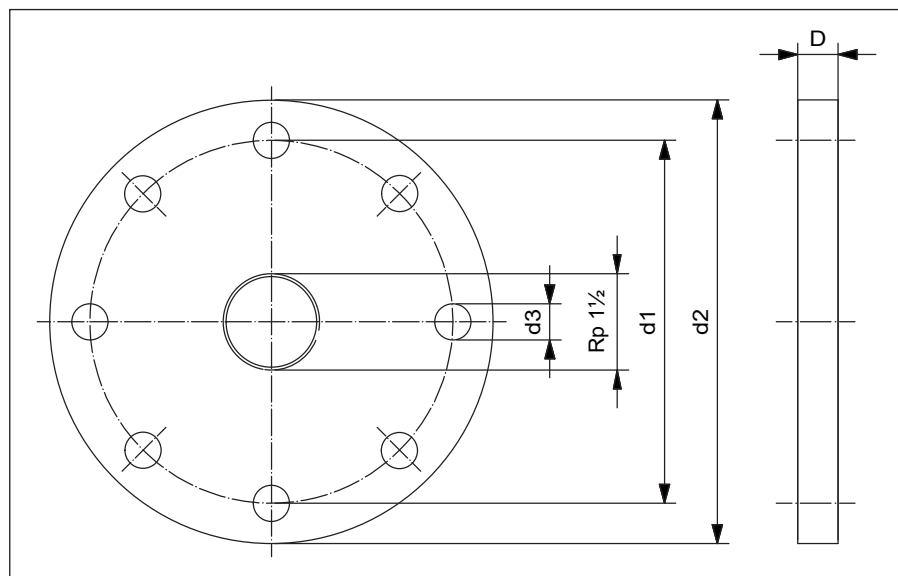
Dimensions of mounting flange (connection dimensions in accordance with EN 1092-1)
